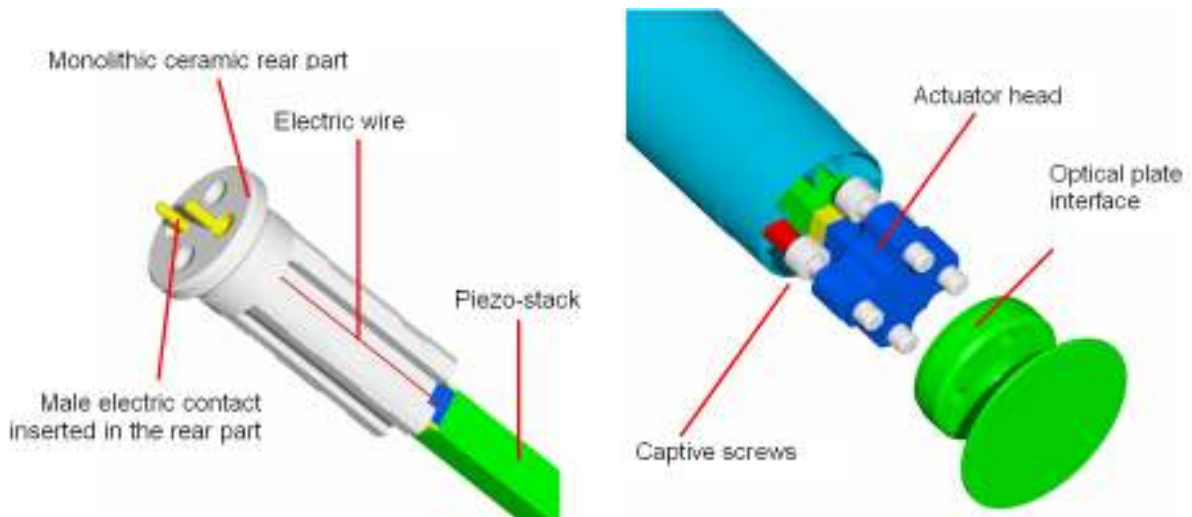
Preliminary design of the PZT actuators (Left: Rear part, Right: Optical plate interfaces)
